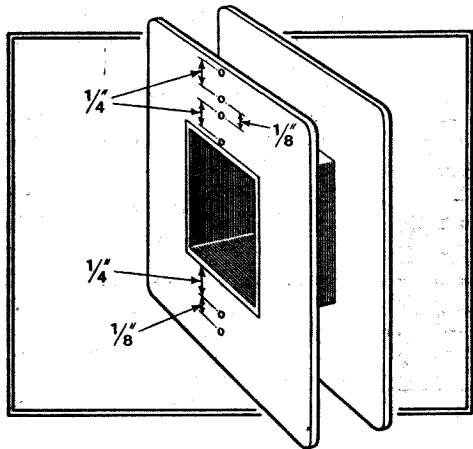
Position of the wire holes in one of the two bobbins. Both are drilled in the same manner.
